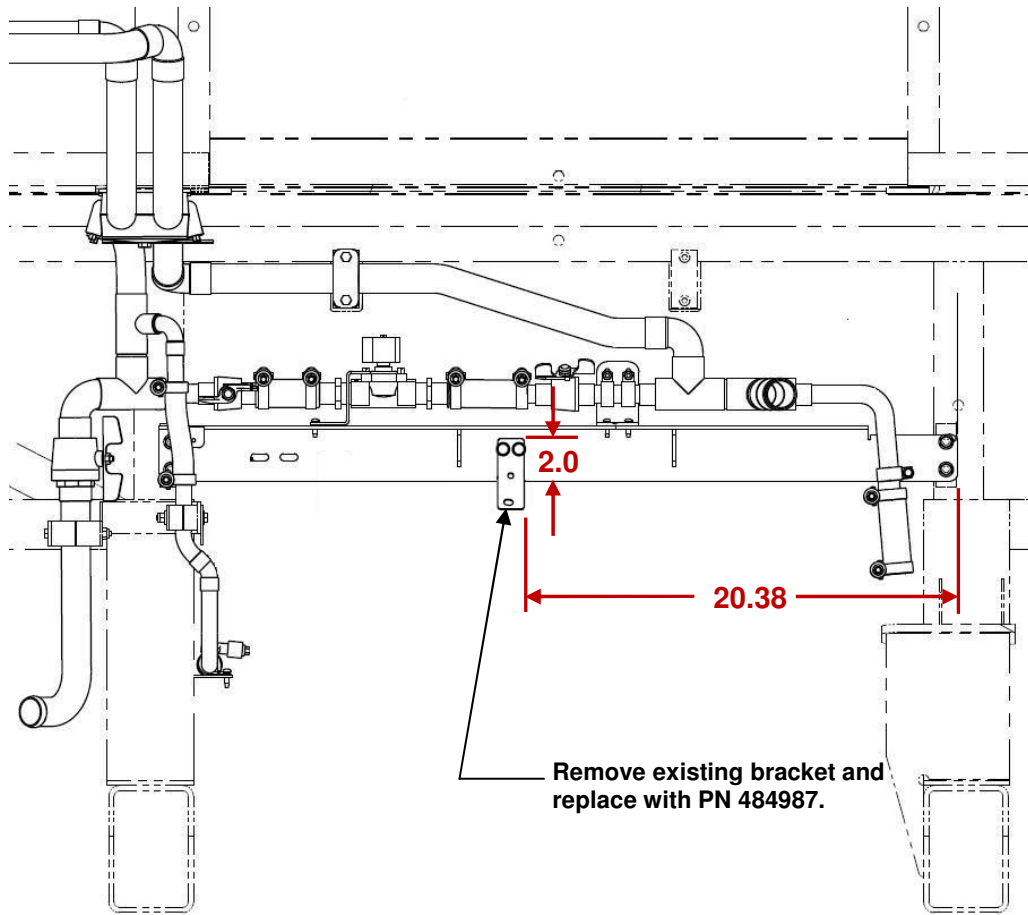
Clamp Plates (Aux heater and engine removed for clarity)
